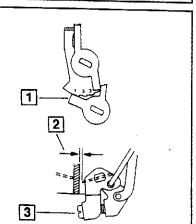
PUMP STROKE LIMITER ADJUSTMENT (Where Applicable)
